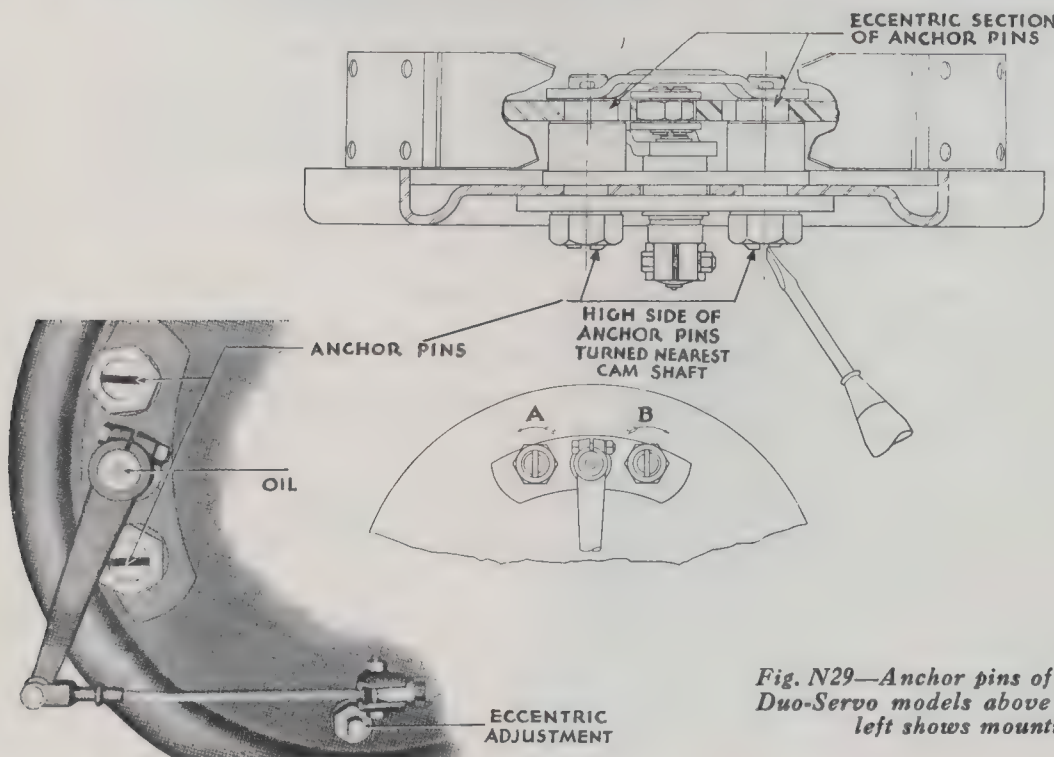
Anchor pins of the eccentric type as used on Duo-Servo models above 16 inches. View at extreme left shows mounting at left rear brake
